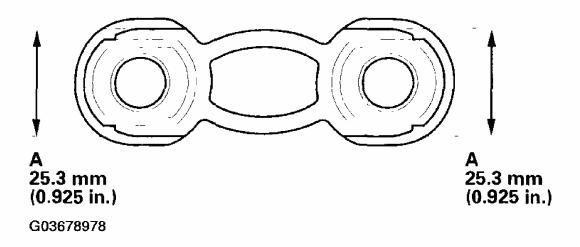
Identifying Thickness Of Slider Guide Courtesy of AMERICAN HONDA MOTOR CO., INC.
